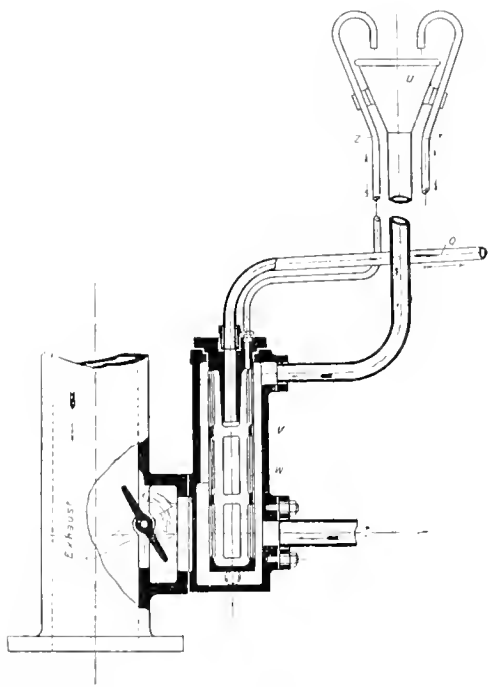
OIL HEATER OF THE CROSSLEY HEAVY-OIL ENGINE
